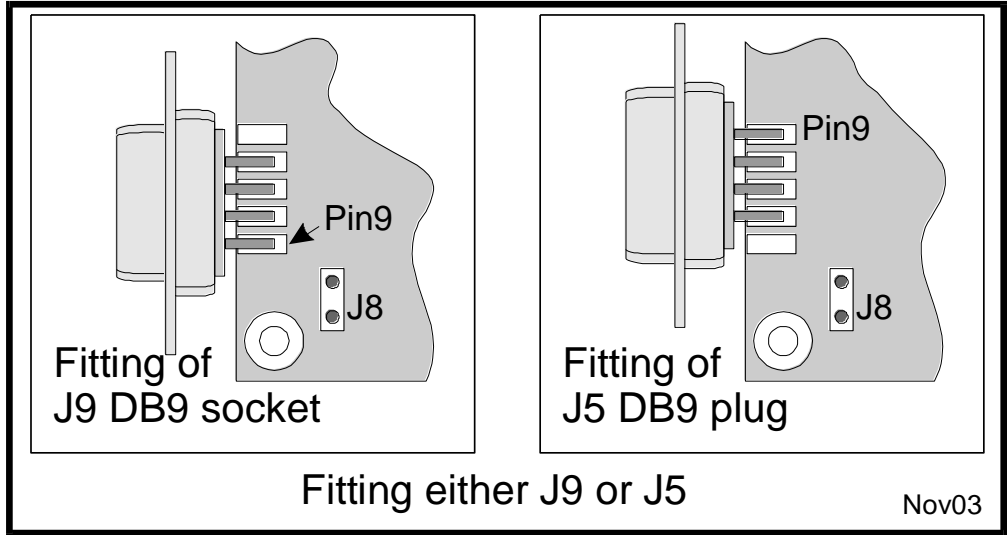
Fitting J9 (standard socket) or J5 (plug)
